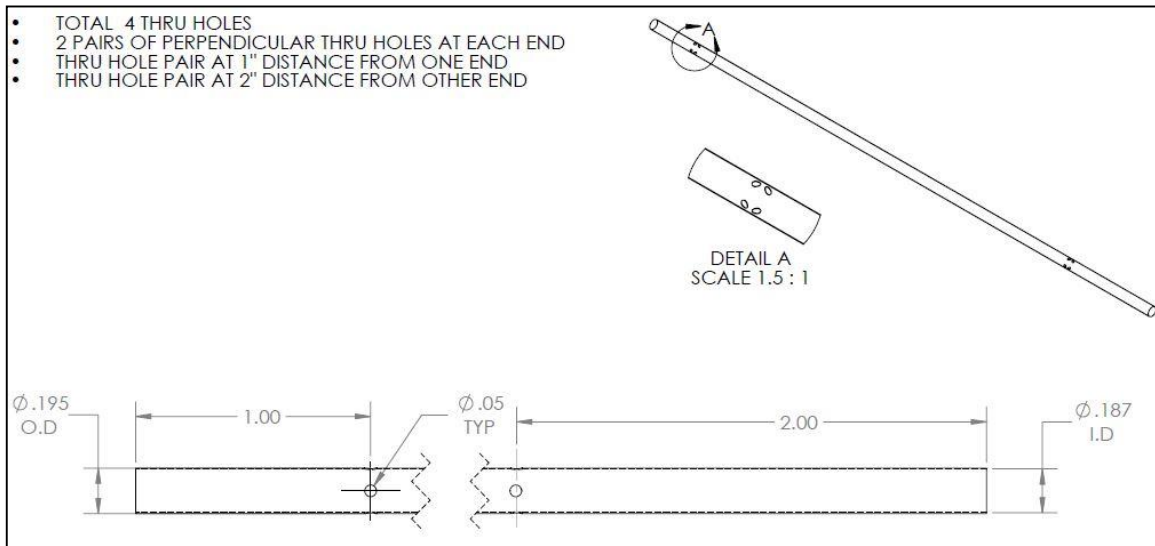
CAD drawing of stagnation tube which houses the thermocouple probe
